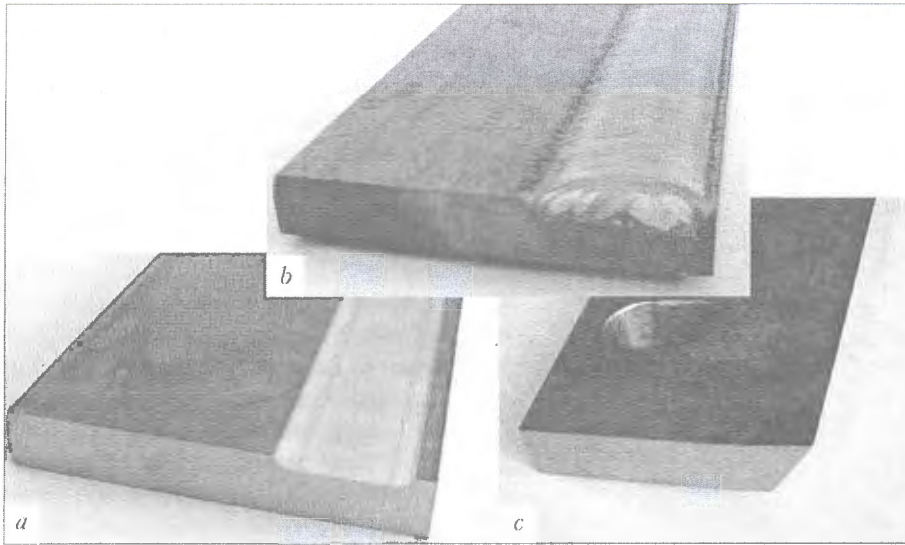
Hardfaced technical blades: *a* – blank part; *b* – workpiece after welding; *c* – after end machining
